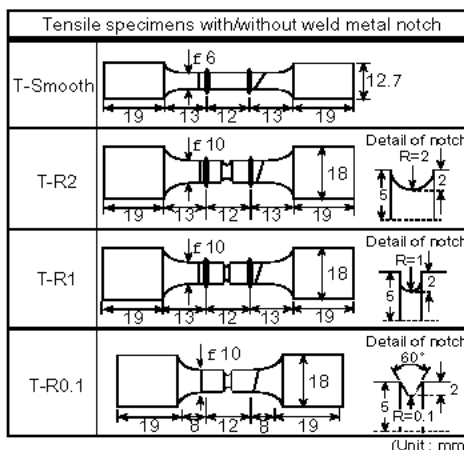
Configuration of round-bar tensile specimens with /without weld metal notch.
